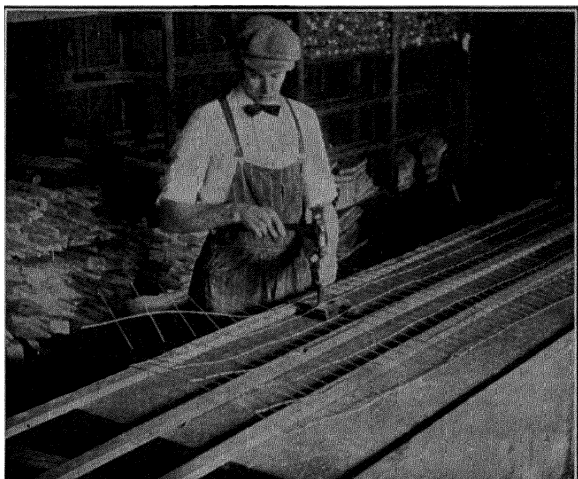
Making seed corn hangers out of electric welded fence. Note the alternate wire method of cutting.
